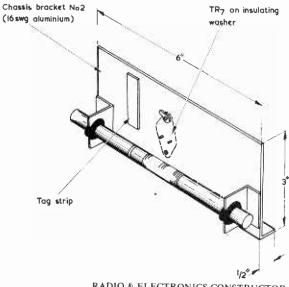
Physical layout of the p.a. stage. The parts are mounted on Chassis Bracket No 2
